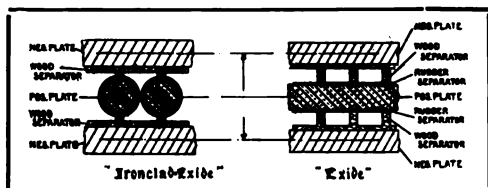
Horizontal Sections Showing Positive Plate Construction.
